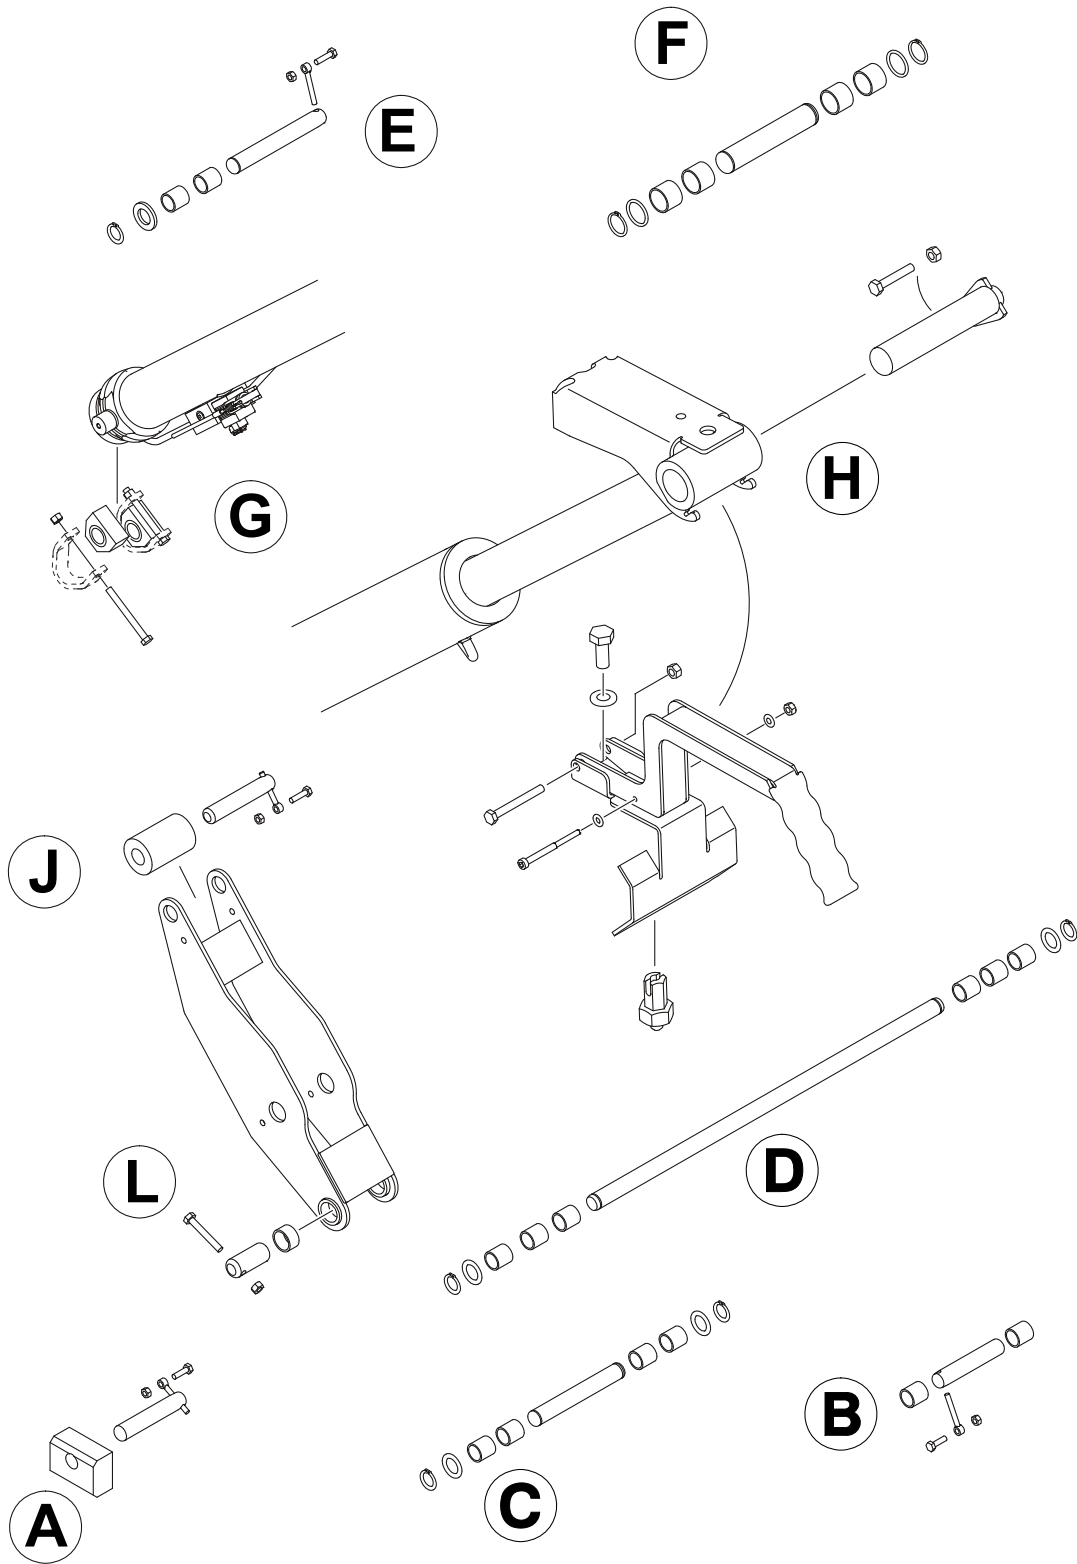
3248RS/10RS - Scissor Arm Assembly - Pin Configuration
